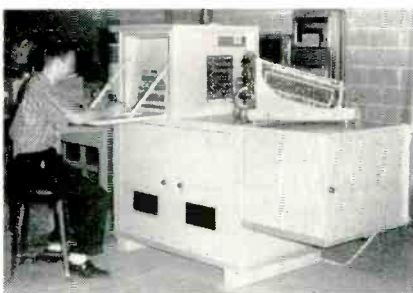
(above): While testing indicator control assembly, panel cover provides a good writing surface for operator.
